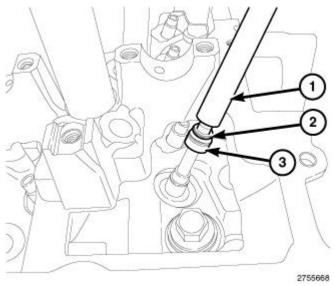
Installing Valve Guide Seal Courtesy of CHRYSLER GROUP, LLC
